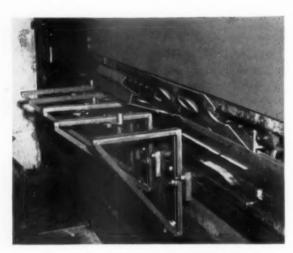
Set up for a serial operation, this machine performs several operations on the same piece before it is removed.
